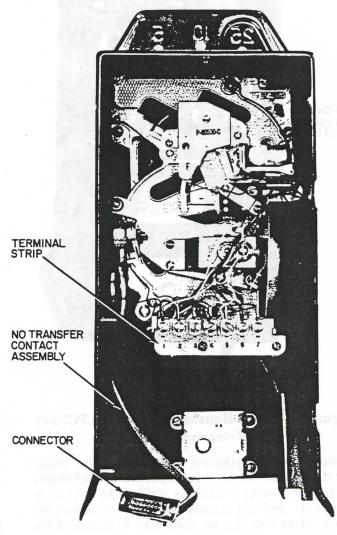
Upper Housing Assembly, LPC82-55 Coin Telephone Set.
